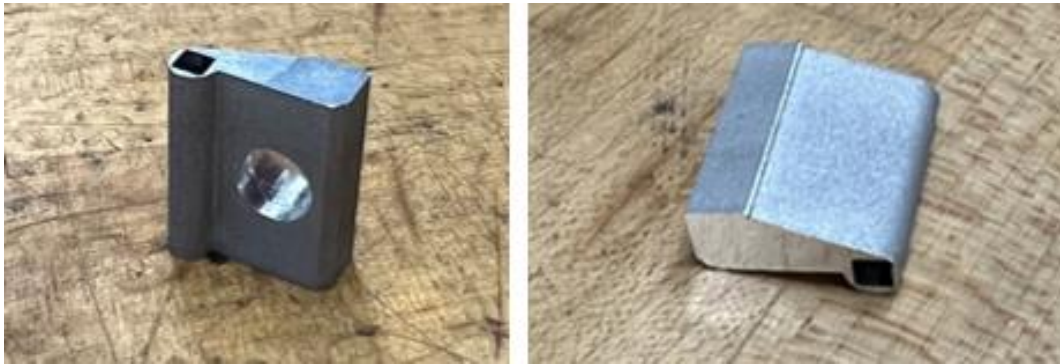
Two Perspectives of Key Handle Component Showing Different Surface Finishes
